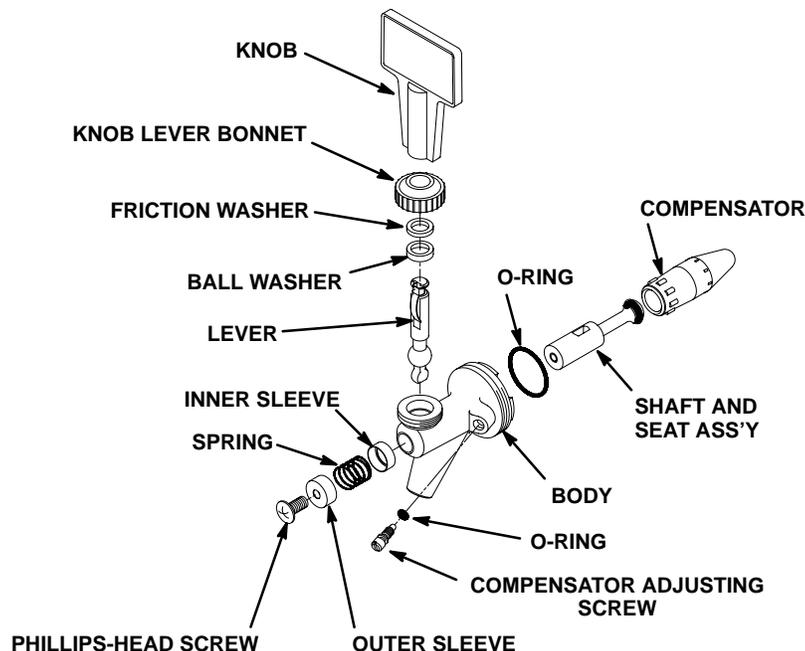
DISPENSING VALVE PARTS IDENTIFICATION
